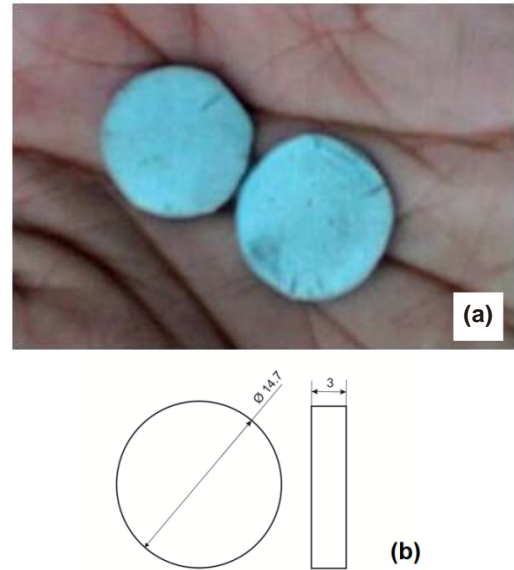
The specimens of fuel tank: (a) Photographic view of the specimens and (b) the dimension of specimen (in mm)
